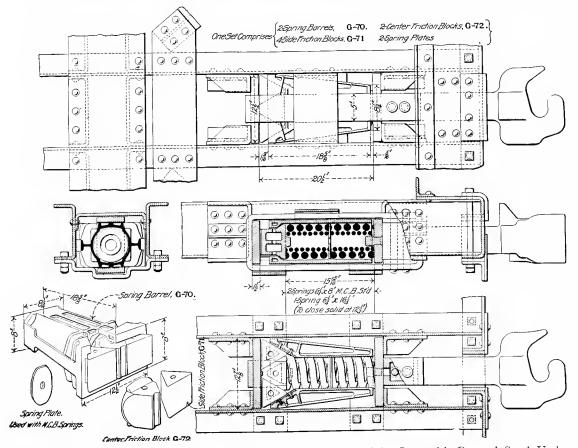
Sessions-Standard Friction Draft Gear, Type C, for Freight Cars with Pressed Steel Underframes. Standard Coupler Company.
